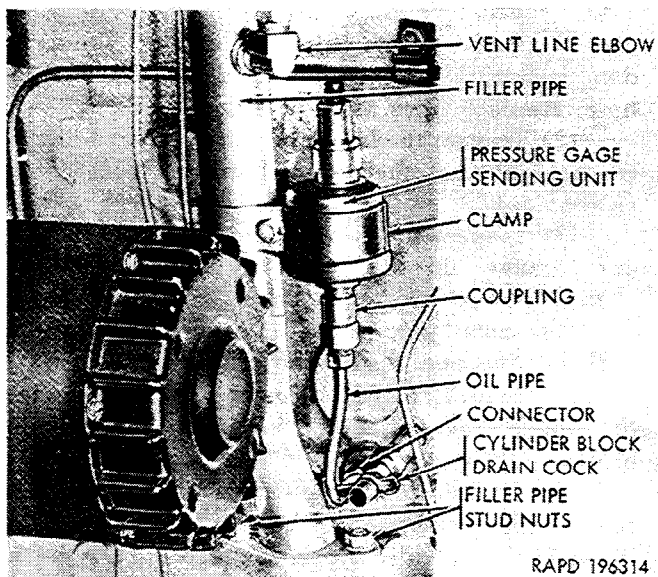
Oil filler pipe and oil pressure gage sending unit.
